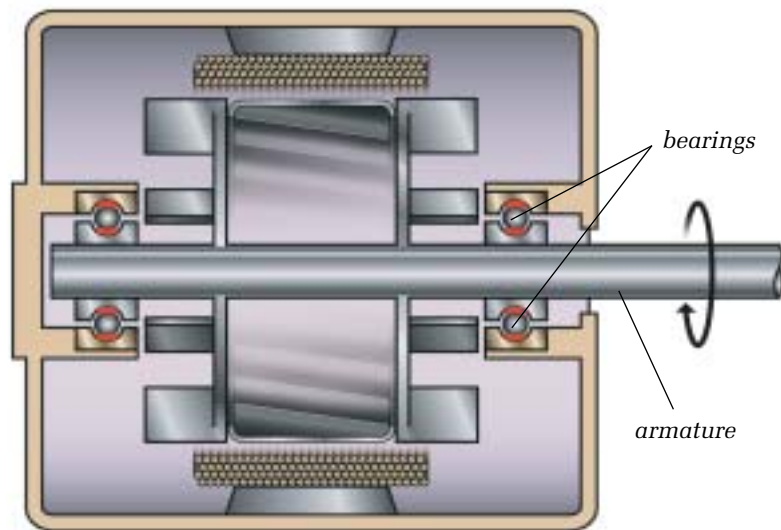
An electric motor has few moving parts and much less friction than a combustion engine.
